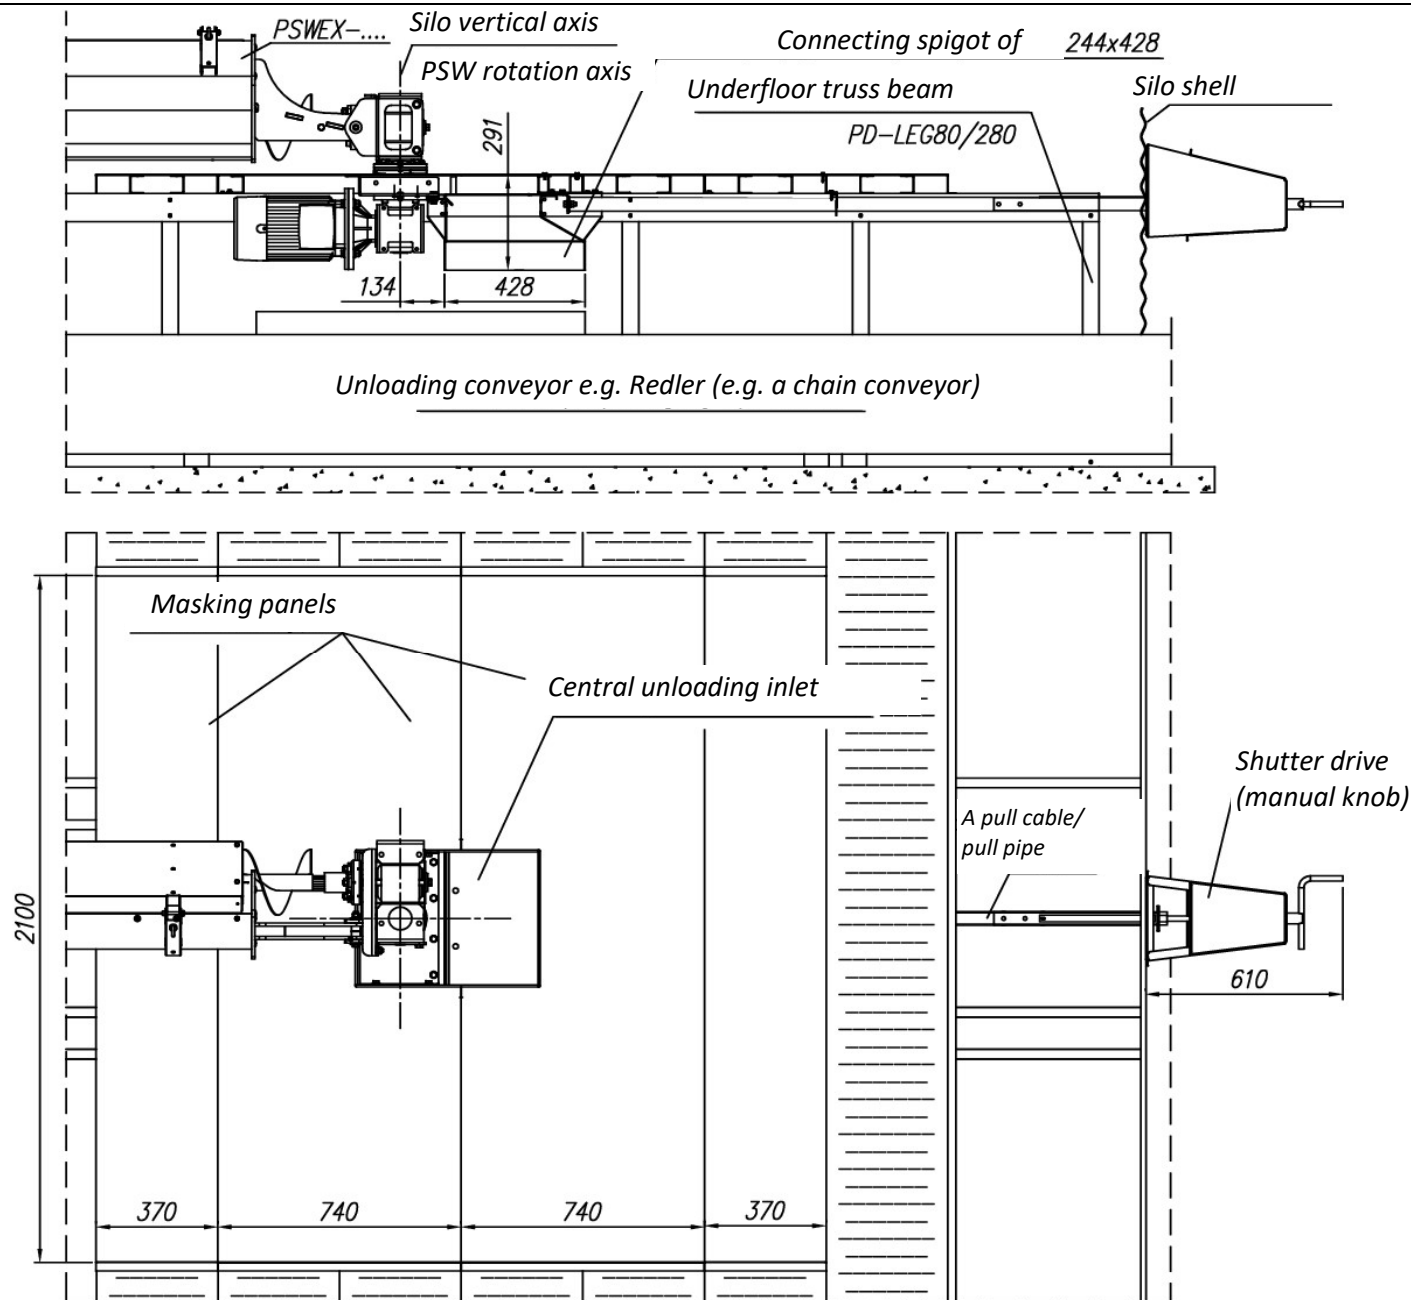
The way for installing PSW equipped with accessories of the PSWEX-WLC-RS-UNI type - the central inlet of the PSWEX conveyor to silos with a steel floor on steel trusses (dimensions as mm).
